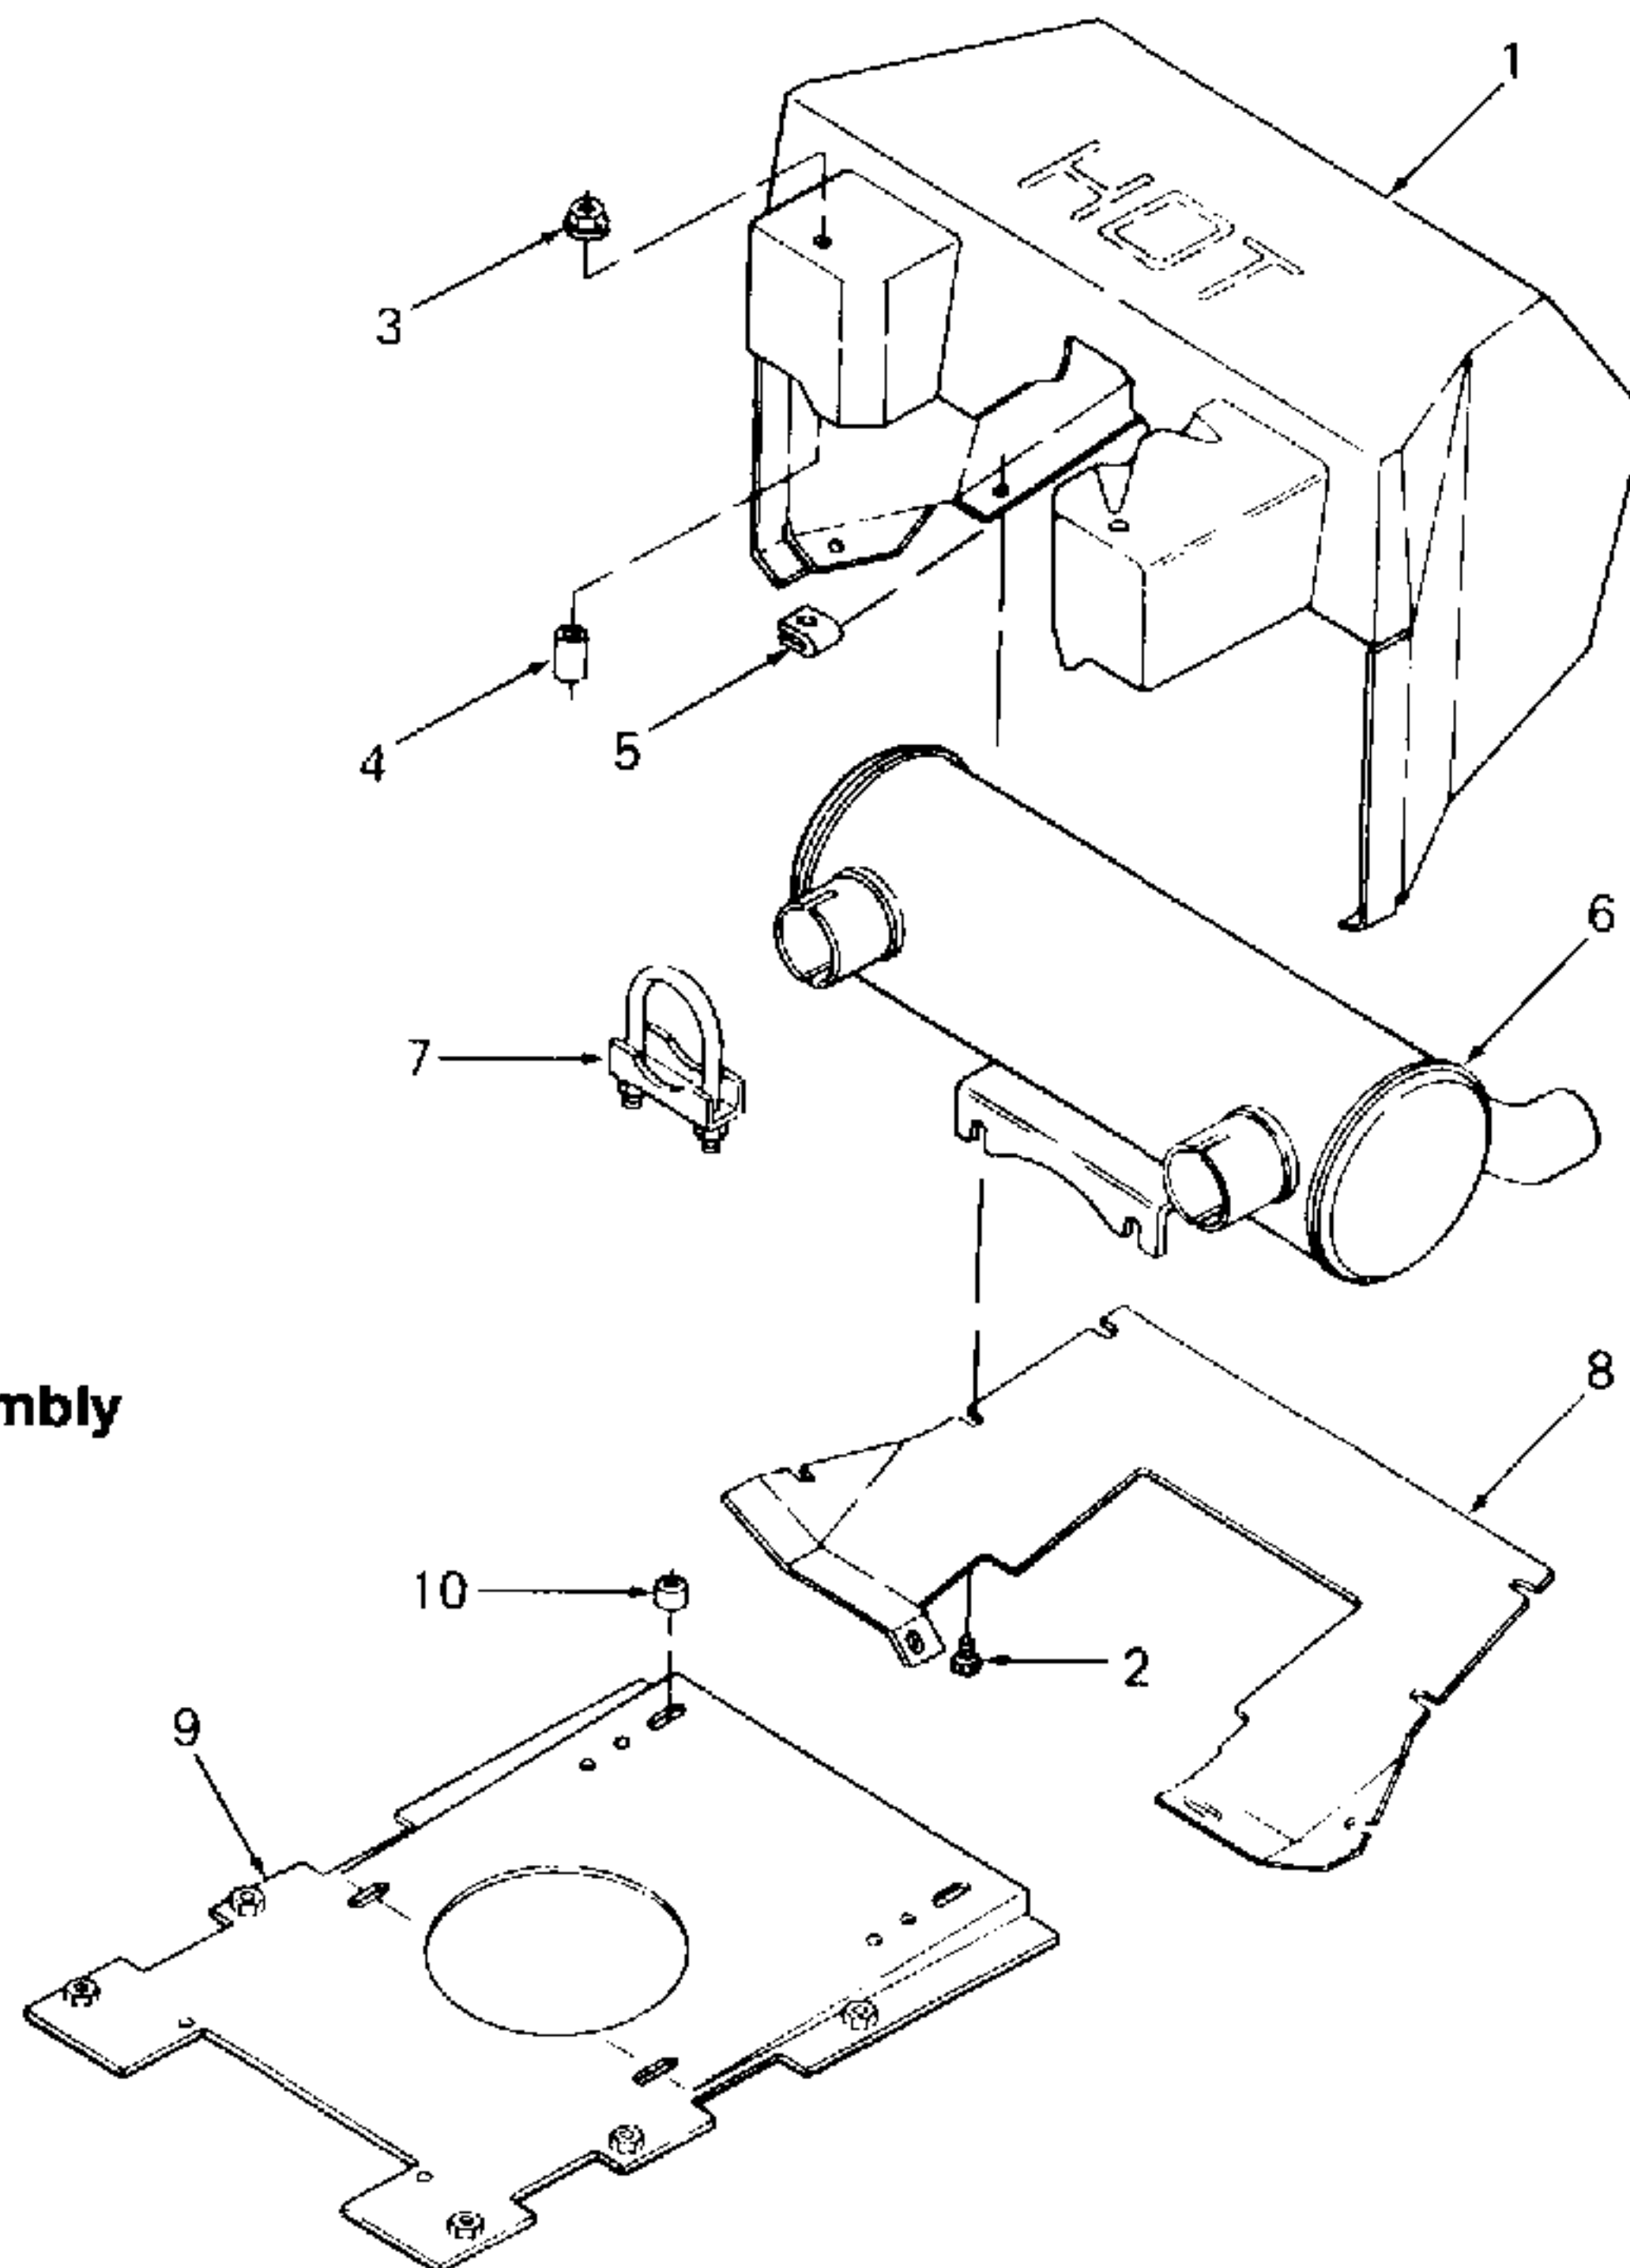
Engine Mounting, Muffler and Air Duct (Models 1535, 1541, 1860, 1862, 1882 and 2082).
